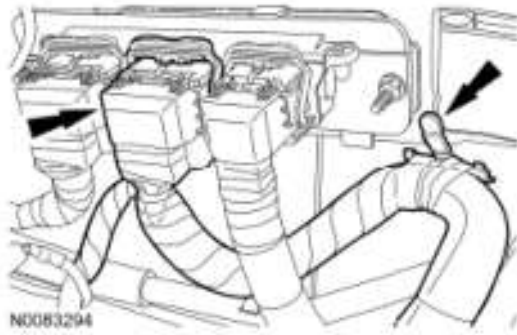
Locating PCM Electrical Connector And Engine Wiring Harness Retainer
